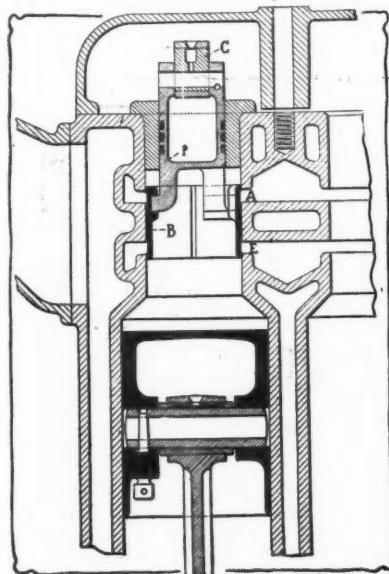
Diagrammatic section of René et Bois sleeve-valve motor
